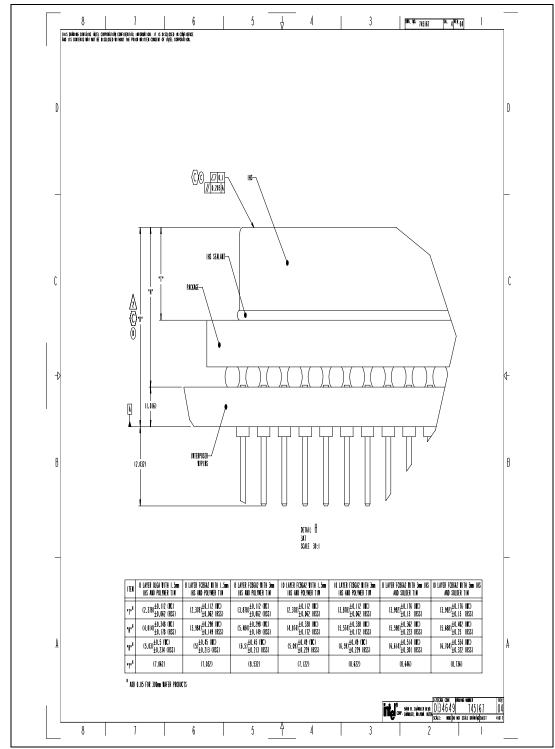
603-Pin Interposer Assembly Drawing (Sheet 3 of 7)
